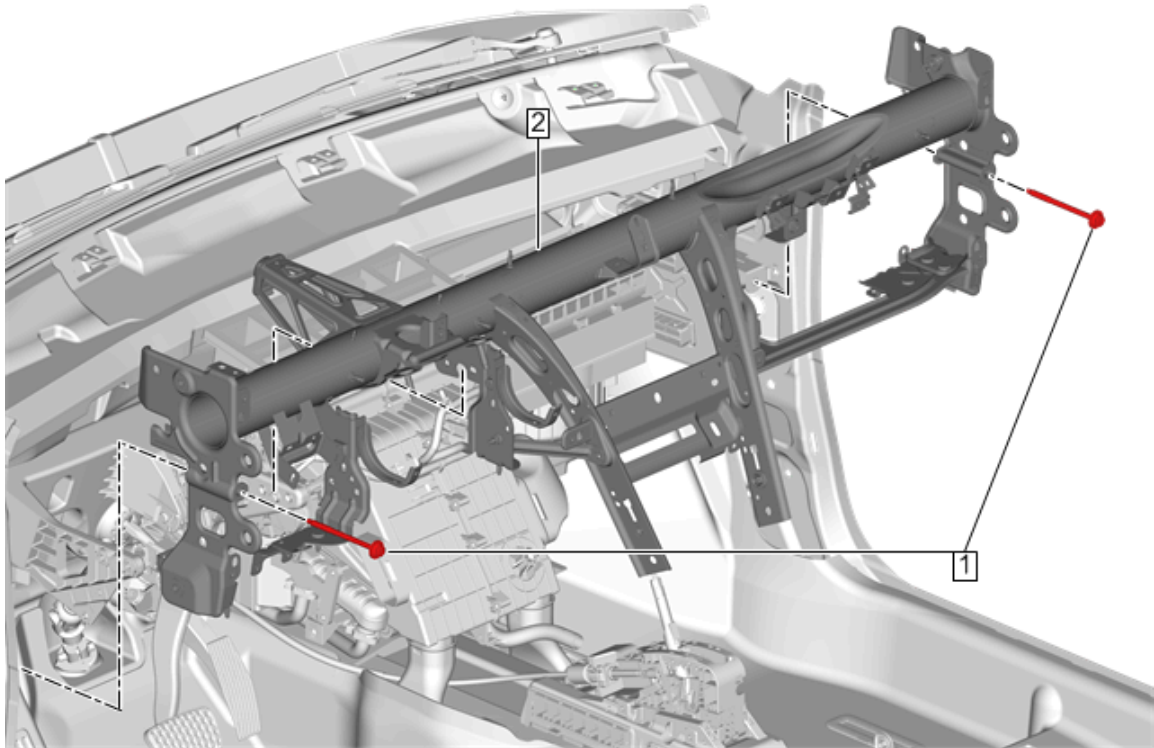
Instrument Panel Tie Bar And Reinforcement Bolts
